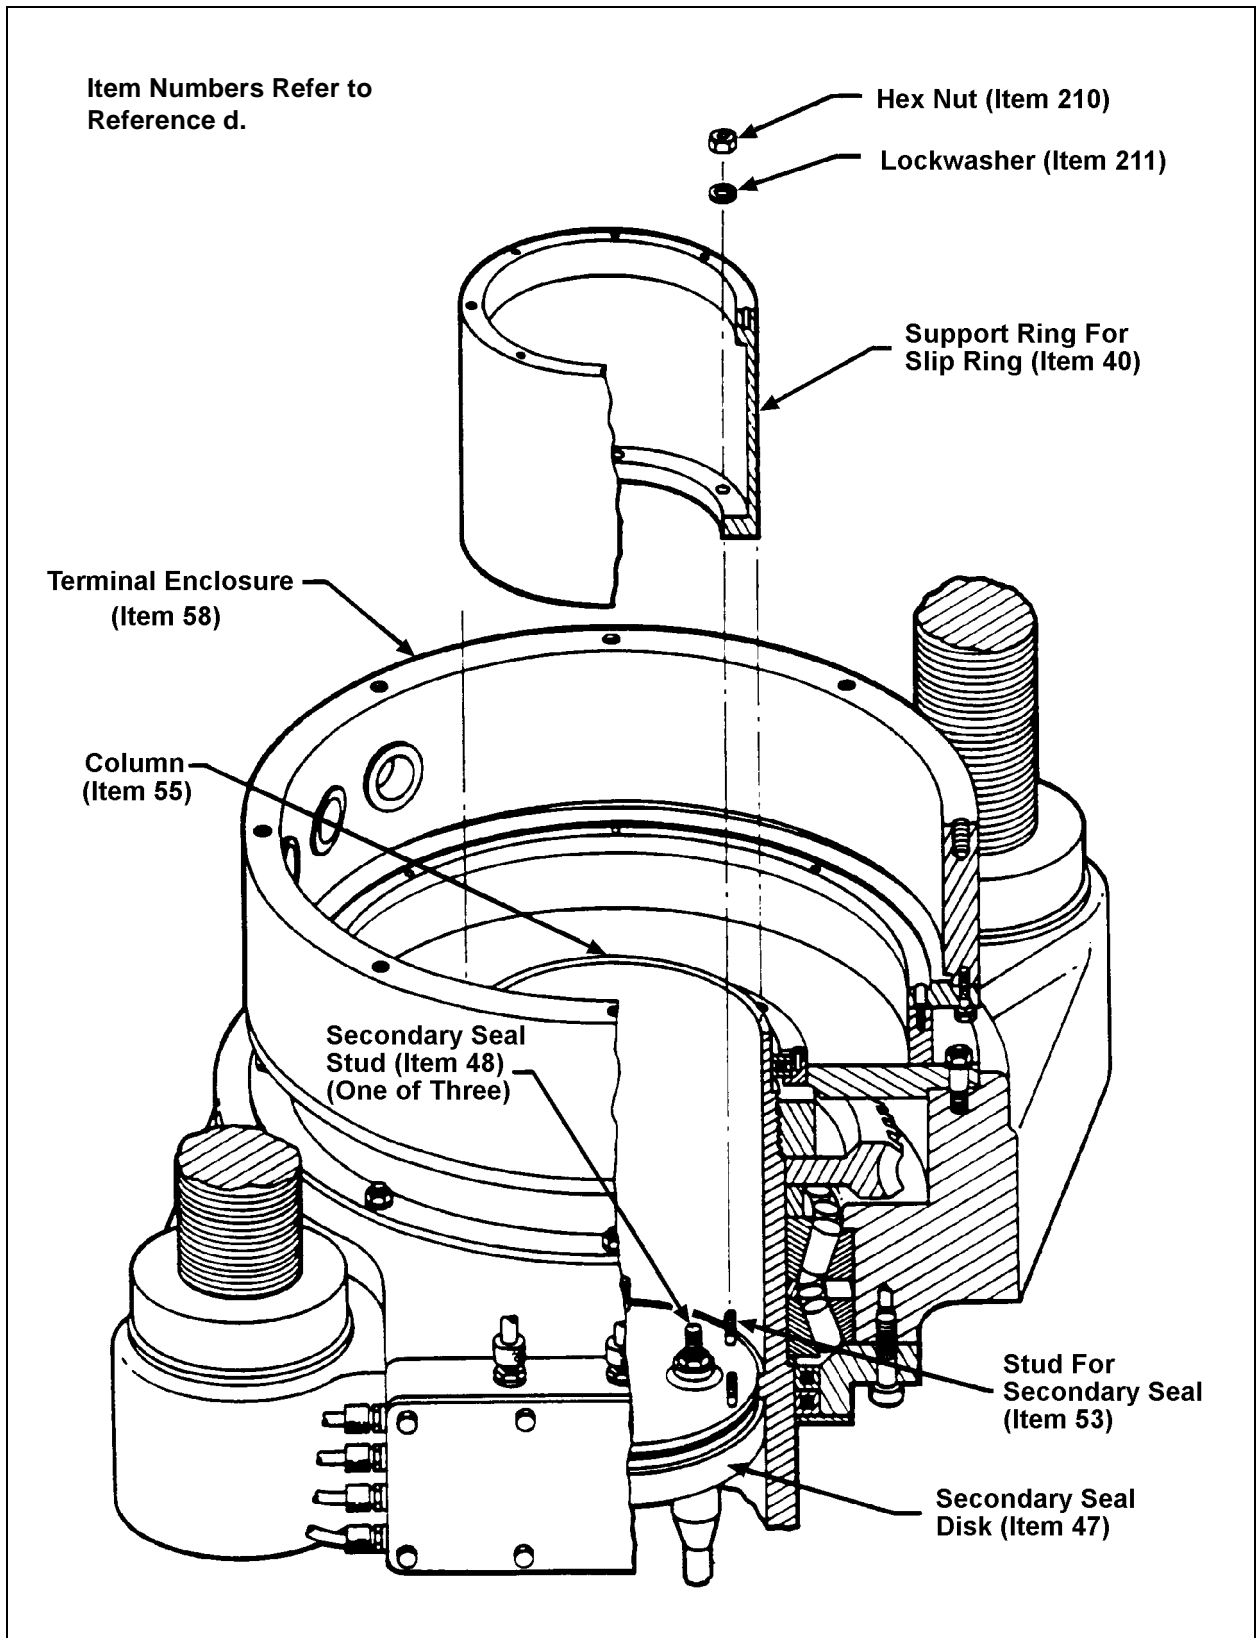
Training and Retracting Device with Brush and Slip Ring Assemblies Removed.
